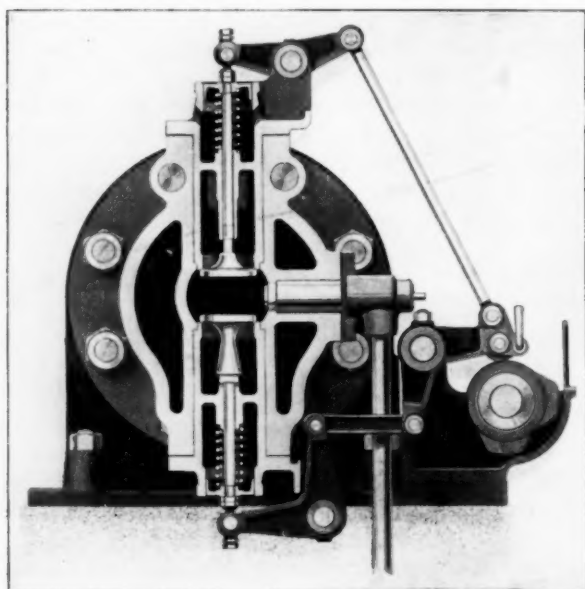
SECTION THROUGH VALVE CHAMBER OF McEWEN HIGH-COMPRESSION OIL ENGINE
